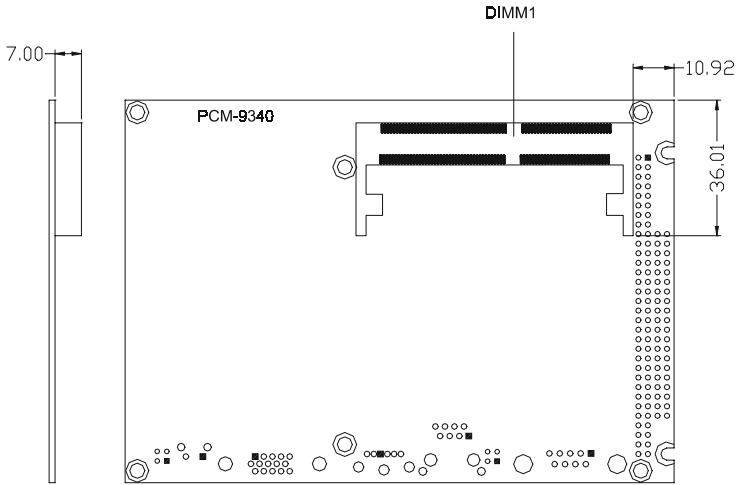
PCM-9340 Mechanical Drawing (solder side)
